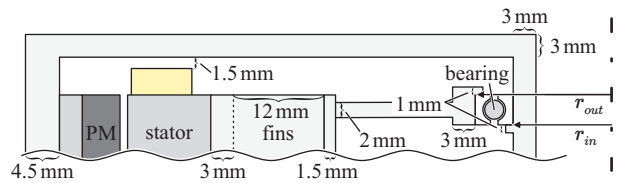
Sectional drawing of an external rotor machine including electromagnetically inactive materials. The stator is mounted on a 3 mm thick housing with cooling fins, which have a thickness of 1 mm, a height of 12 mm, and a spacing of 3.5 mm in between. A bearing sleeve connects the housing and bearings. The shaft extends, on one side, around the stator to hold the magnets and the rotor core.
